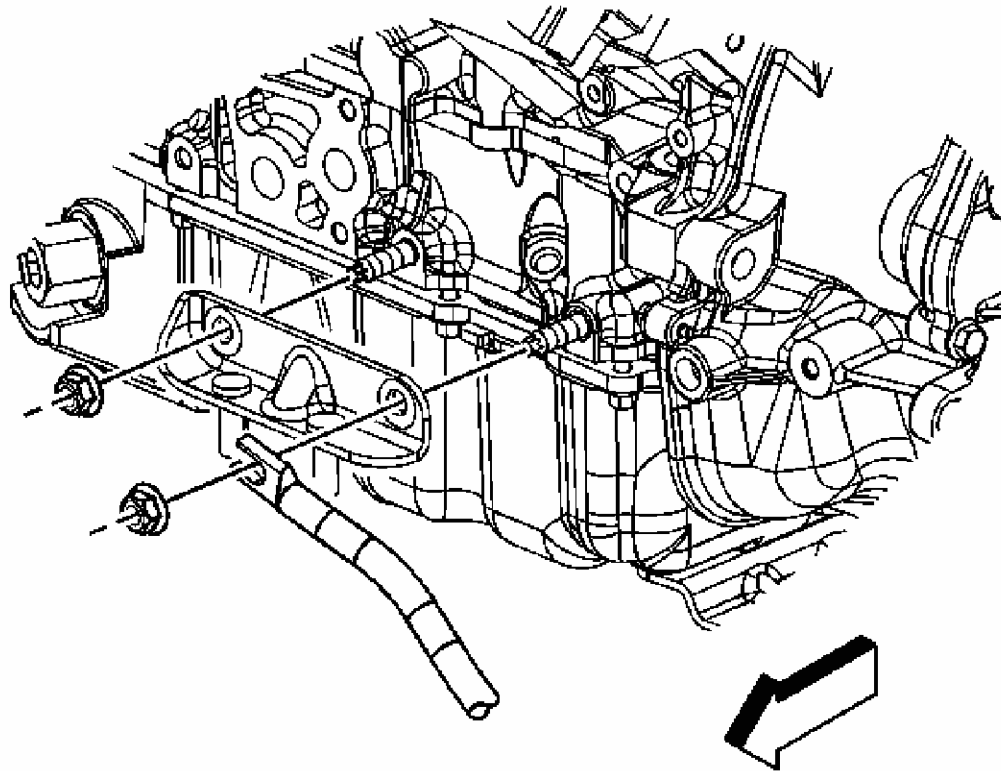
View Of Lower Engine Mount Bracket-To-Engine Stud Nuts
